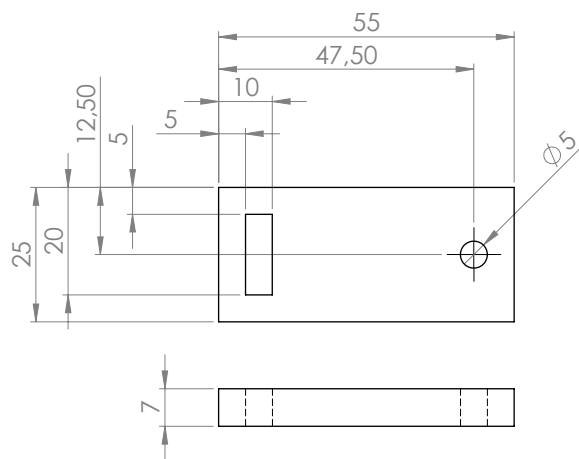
Dimensions of the external arm for both moment-arm designs. Dimensions in mm.
